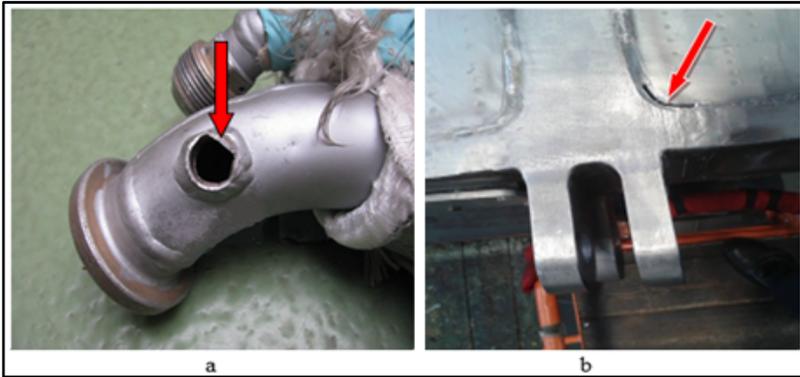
a. Air-con system duct port broken off by the weld in the heat transfer zone [19] b. Crack in the weld of a wing fuel tank [19]
